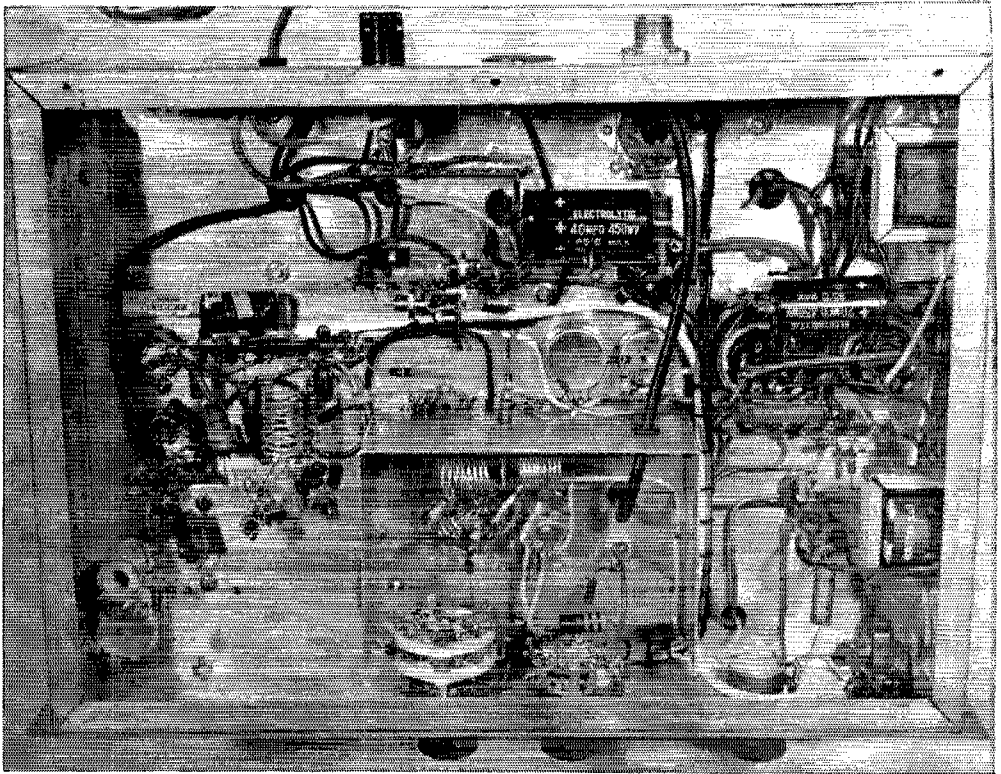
Under-chassis view of the unit, showing placement of shield compartment and various components.
